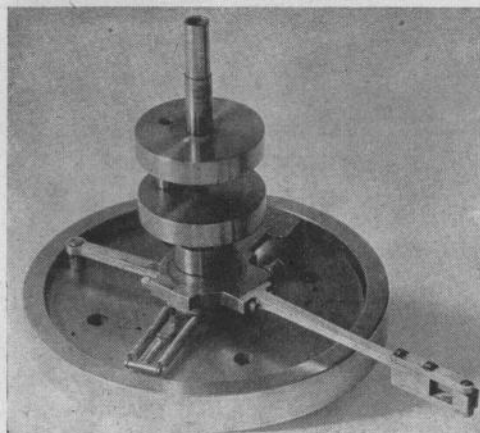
Crankshaft, flywheel, governor gear and eccentric assembly.
